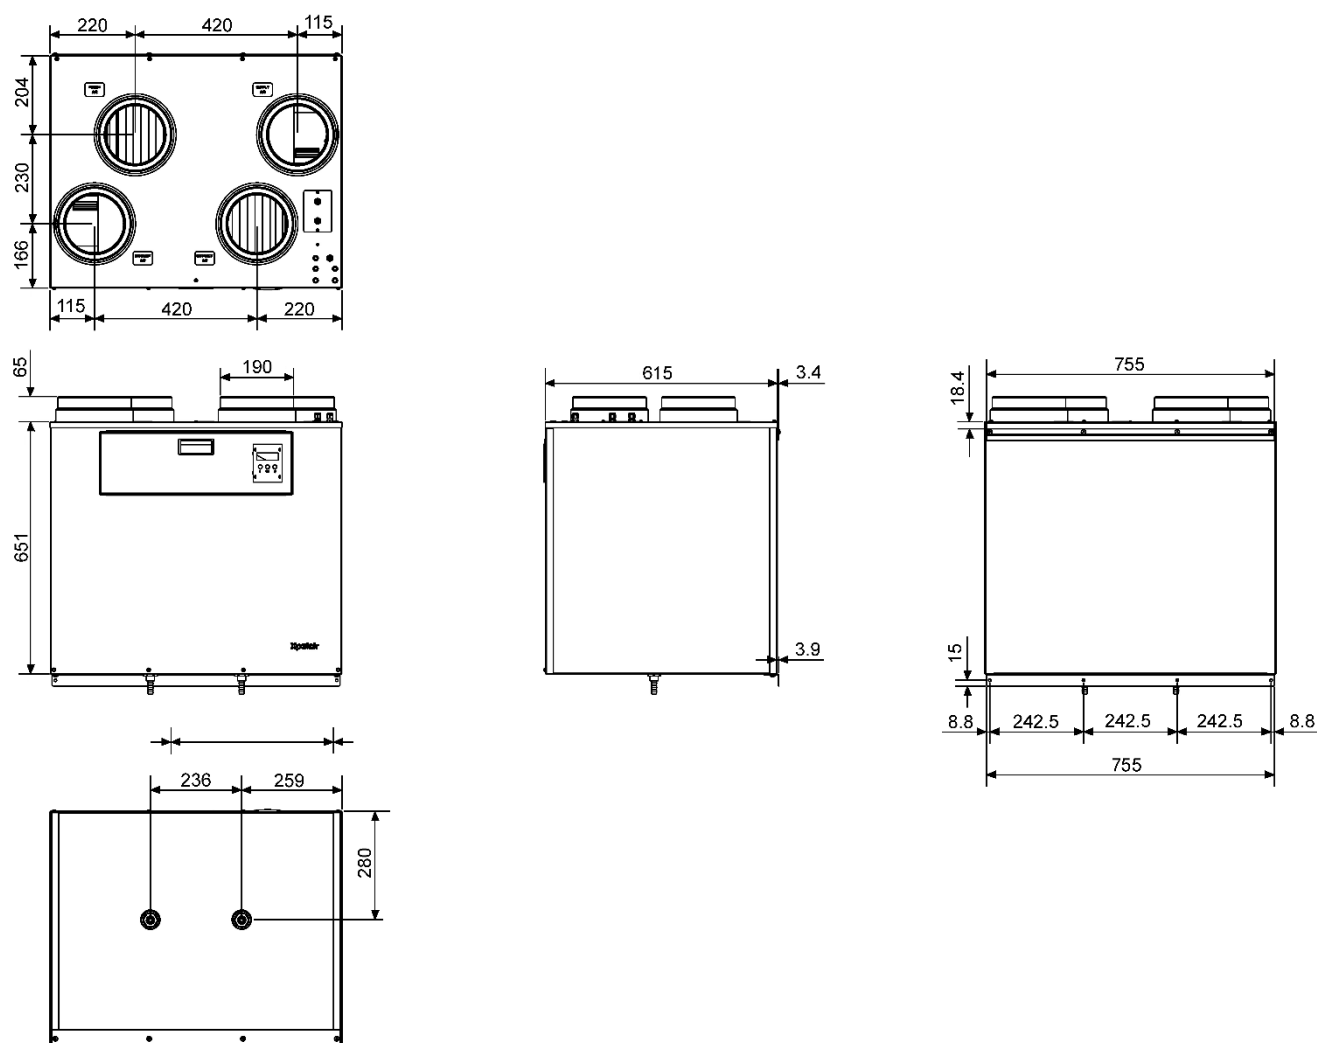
Dimensional drawing, Natural Air 350 ventilation unit
